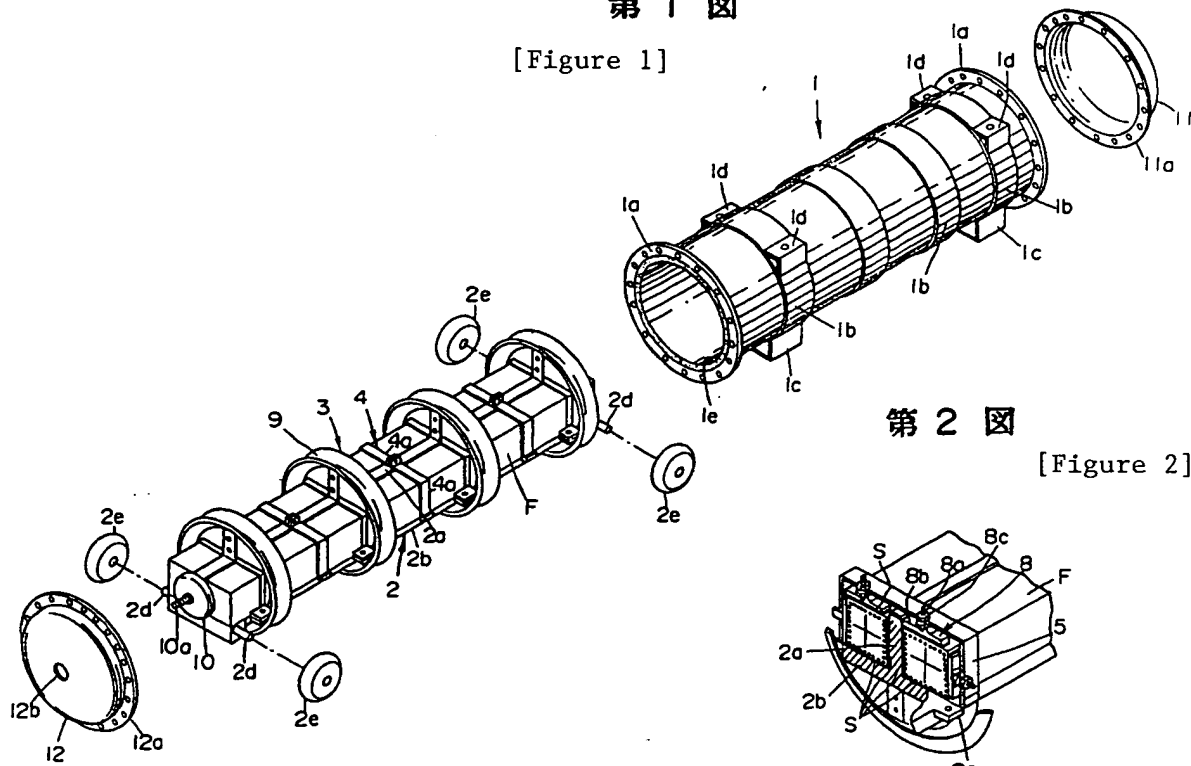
to 3 are drawings showing a practical example of the present invention. Figure 1 is a perspective view of the transport container for a fuel assembly; Figure 2 is a perspective view of a partial cutaway of the installed part of the annular body; Figure 3 is a disassembled perspective view of the annular body; and Figure 4 is a drawing showing a method in which the fuel assembly is installed on the stay.
